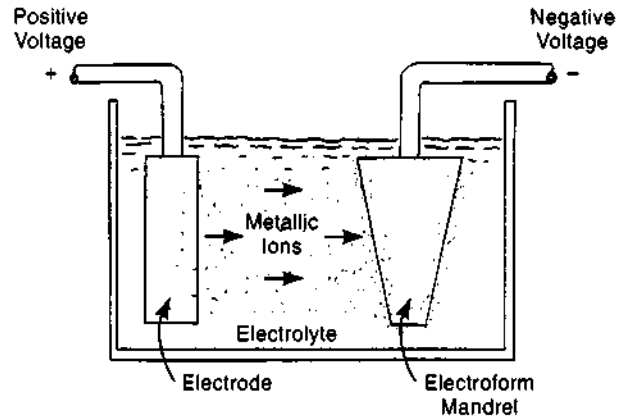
L2 Schematic representation of electroforming. The part is formed from a build up of electroplated coating on a mandrel.
